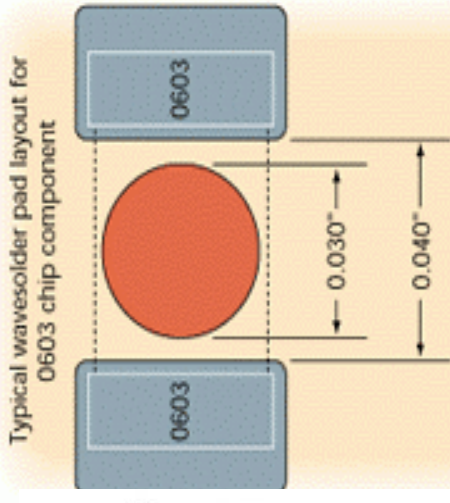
The wavesolder and solder paste pad designs have different adhesive dot size requirements.
